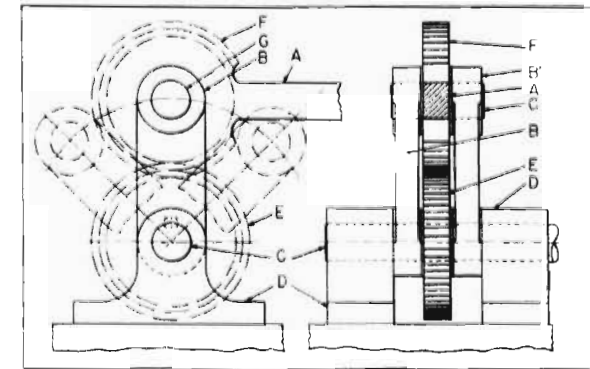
Driving shaft *C* through two gears doubles the degree of oscillation.
